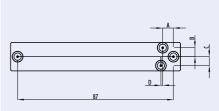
Details of the cross-shaped channel chips with Luer interfaces
